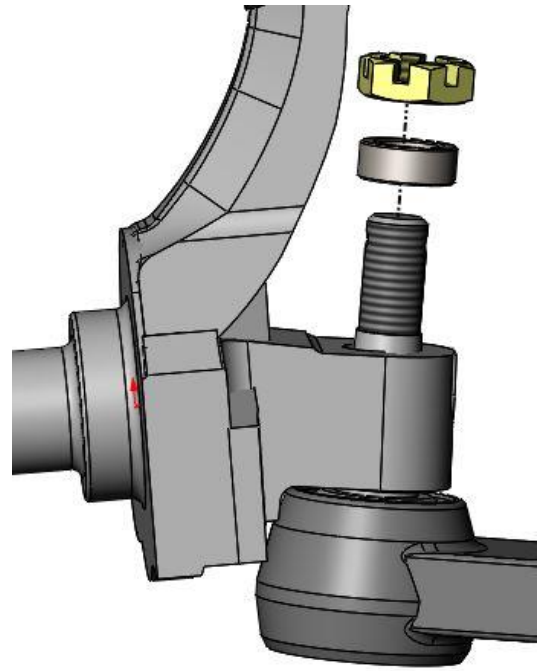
Spacer Bushing Install On Lower Ball Joint
